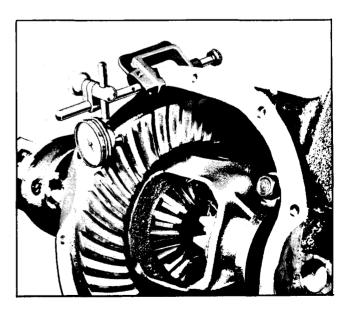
A-43 Checking Ring Gear to Pinion Backlash
